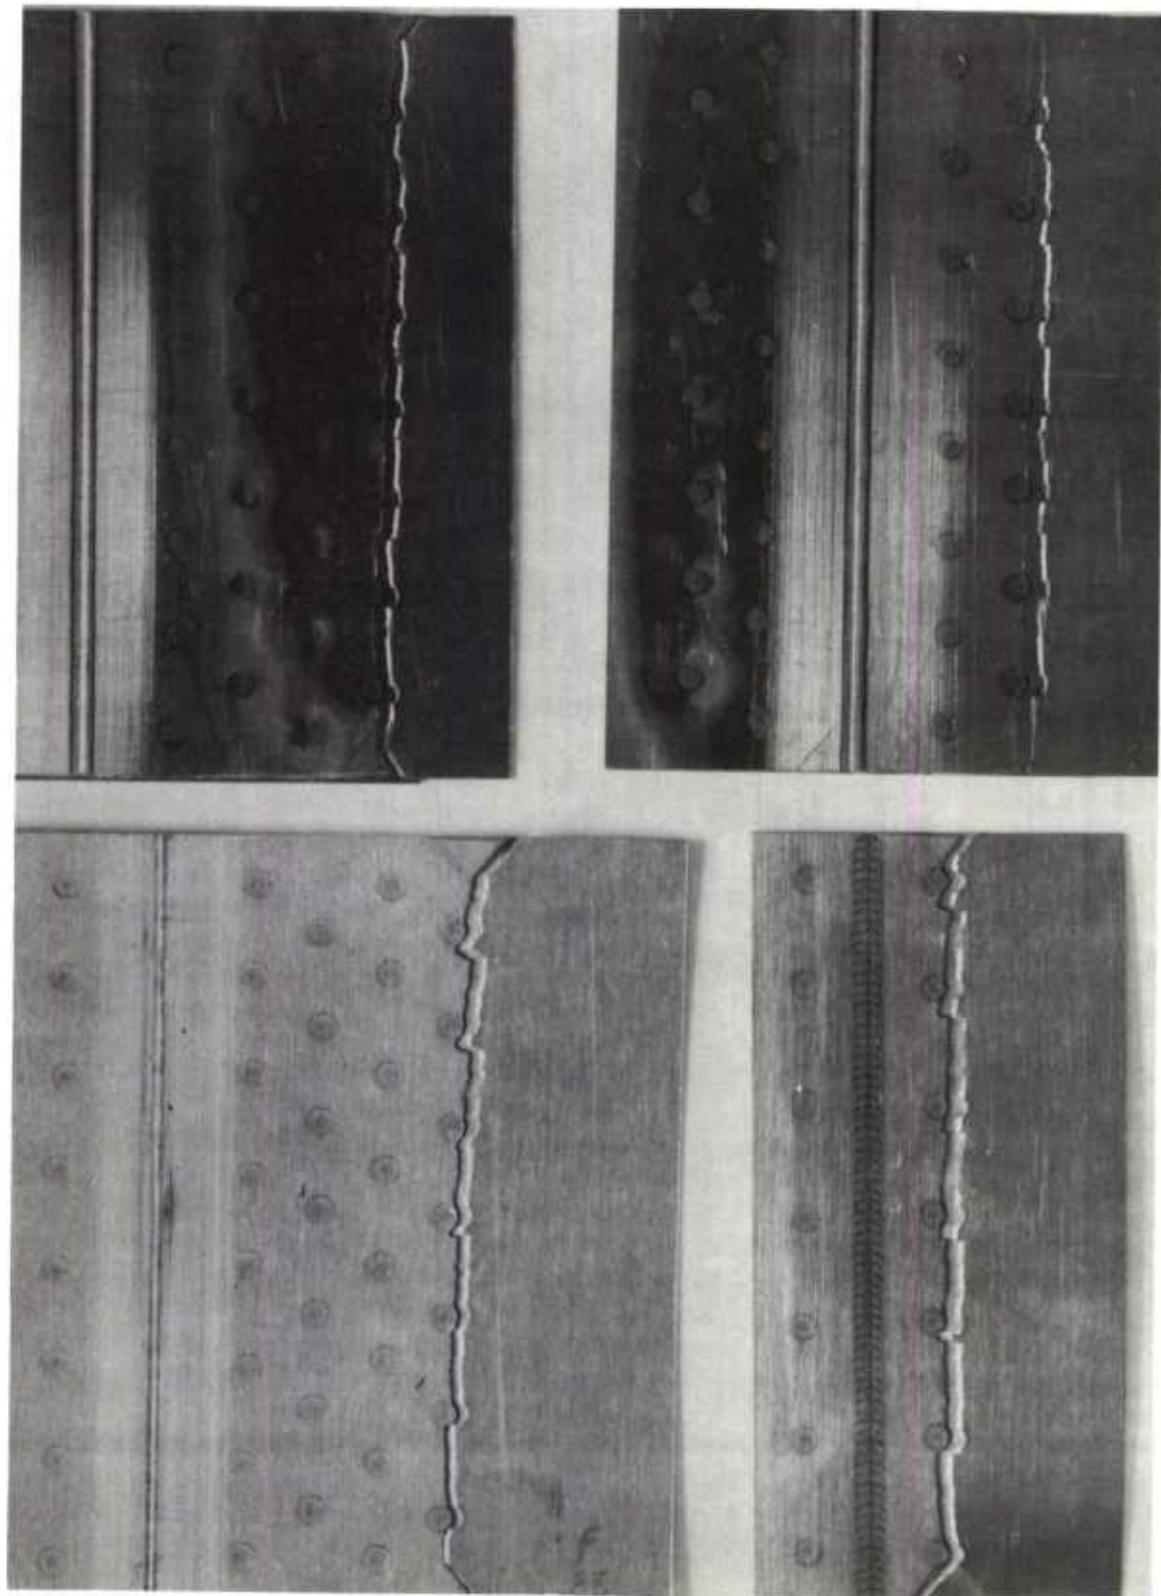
Fractured Fatigue Specimens - 310 SS (78° F)
